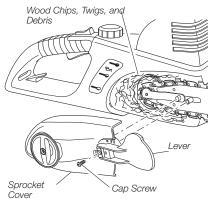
Removing and Clearing Sprocket Cover of Debris
